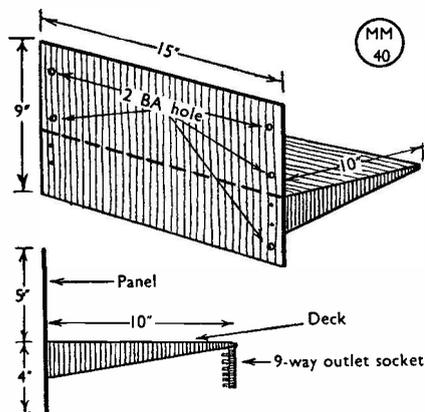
Chassis-panel dimensions as used by GSUM for this transmitter.
